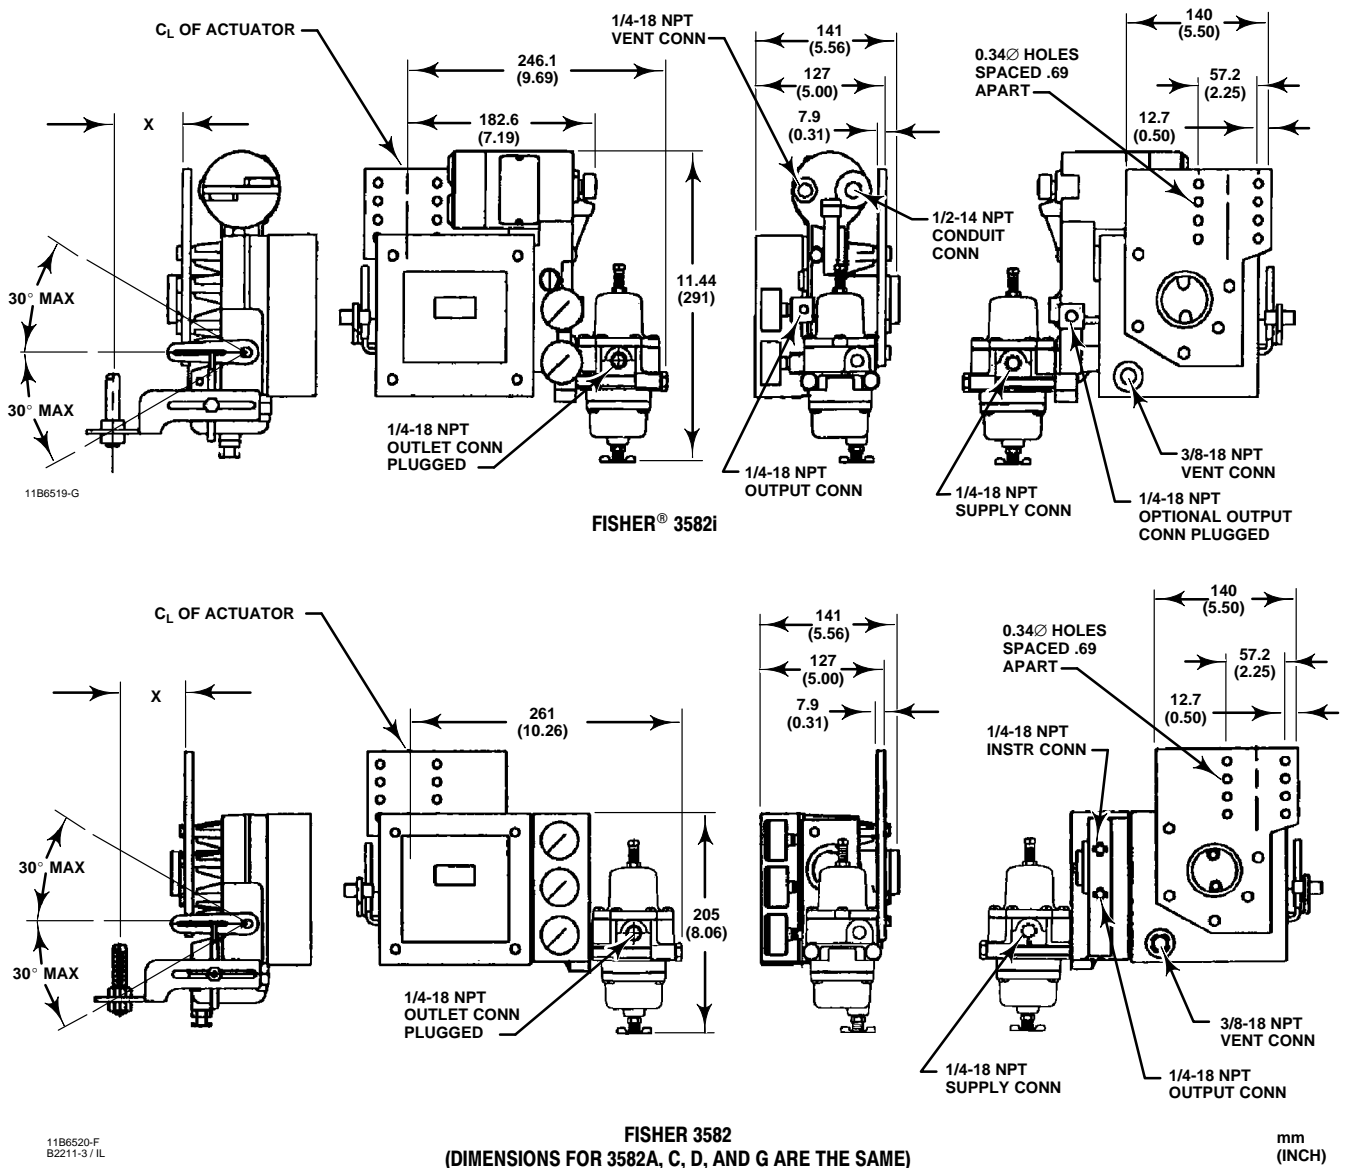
Valve Positioner Dimensions and Connections (see table 4 for the X dimension)
